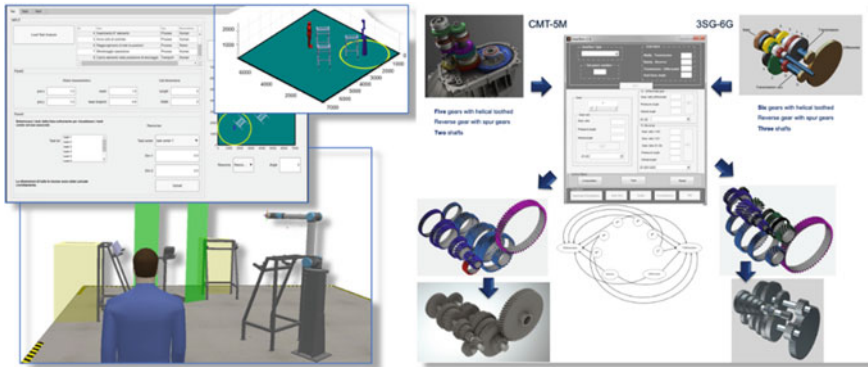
Left: Virtual prototyping of a collaborative workplace for welding point inspection. Right: KBE-approach to the geometric modelling of automotive gearboxes
